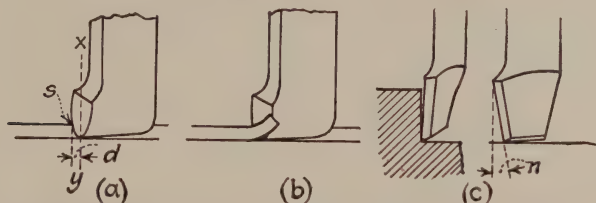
Cutting action of tool when machining a plane surface. Note in view (a) that line *xy* is parallel to the base of the tool and therefore the tool has no front rake. Note also that since the cutting edge is given side rake, the start of the cut is made at *s* and the distance *d* is traversed before the full depth of the cut is taken; thus the tool enters the work gradually and prevents the shock of the full cutting edge striking the metal at once. The way in which the chip curves is shown in (b). In (c) is shown a side tool with the cutting edge ground flat to take a finishing cut, say a quarter of an inch or more wide. Note the angle of shear *n* to give an easy start and finish of the cut. A side tool ground in this way is much used in shaper and planer work for finishing cast iron.
